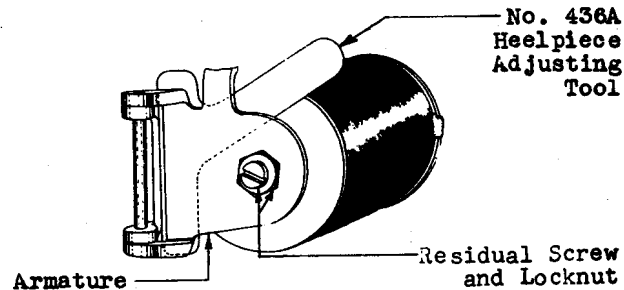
Adjusting the Heelpiece Airgap With the No. 436A Heelpiece Adjusting Tool Inserted From the Armature Side
